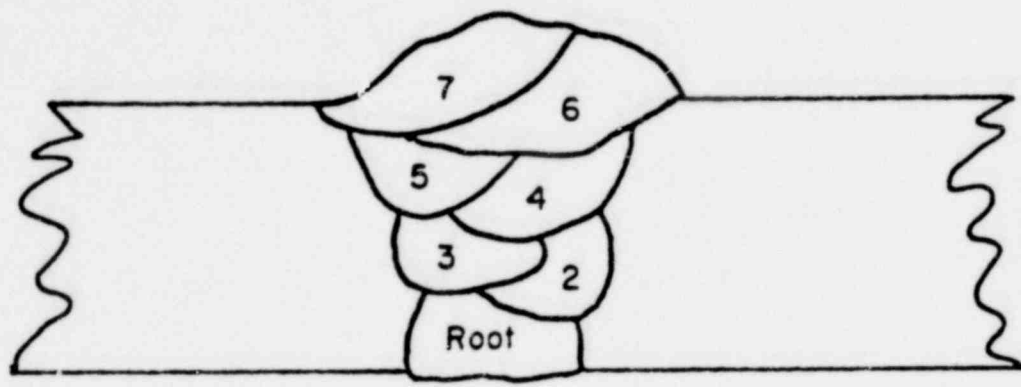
CROSS SECTION OF SEVEN-PASS ANL EXPERIMENTAL GIRTH-BUTT WELD W 27A
